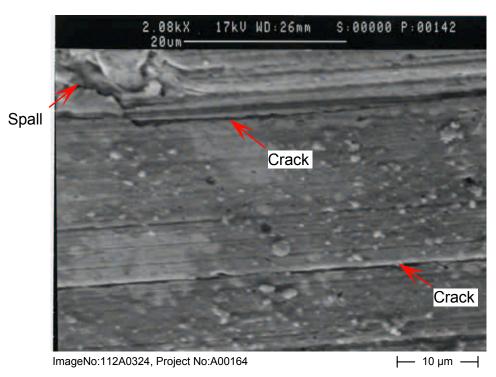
Long circumferential cracks in the lower flank surface of N982AS. The upper crack intersects a spalled area while the lower crack did not.
